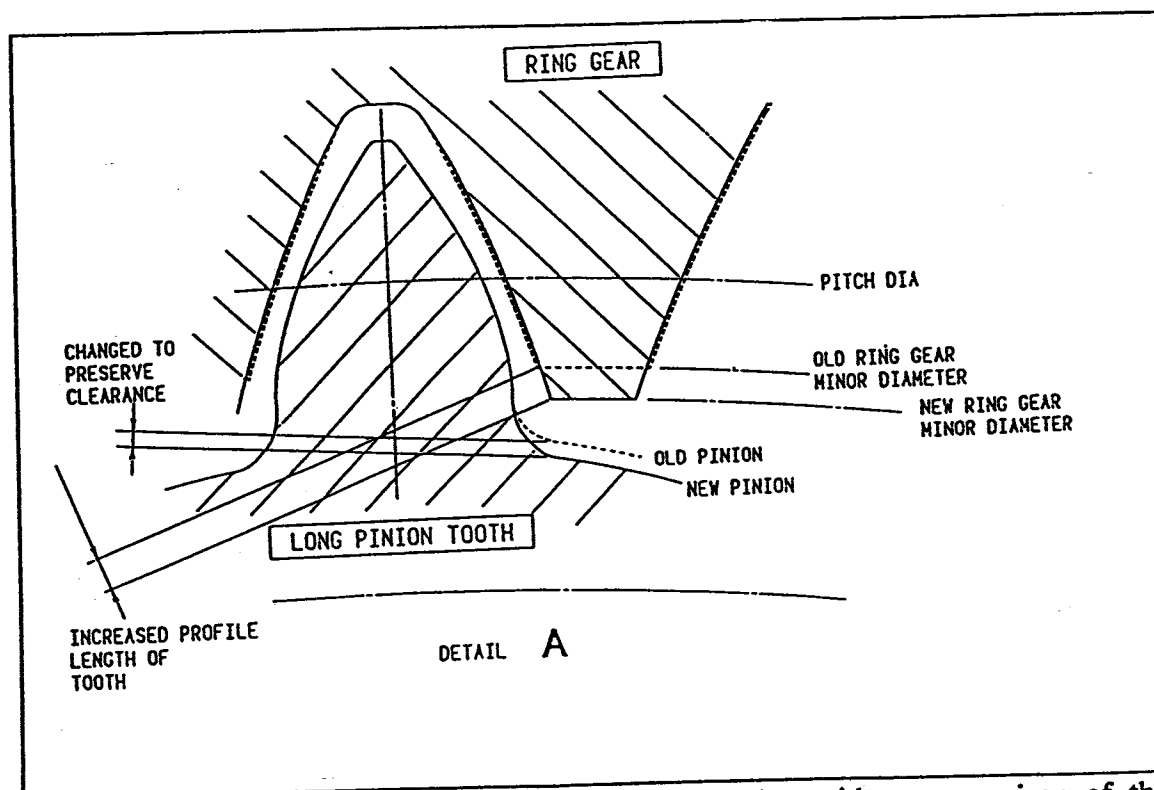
Detail of new gear design changes together with a comparison of the former gear design
